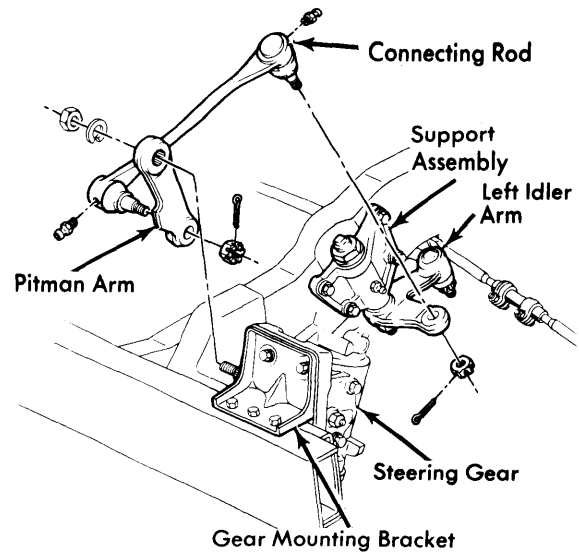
"P" Models Motor Home Chassis Steering Linkage
